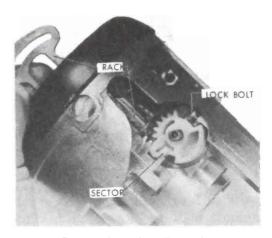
Engaging Block Tooth on Rack to Sector
